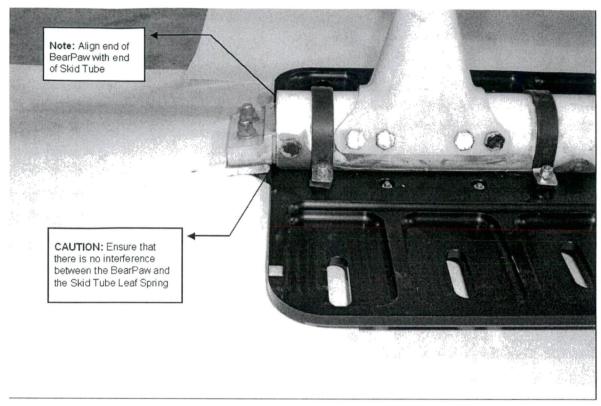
BearPaw Model BP350 (P/N 112-0002-00 or P/N 112-0002-00-S) - Alignment on Skid
